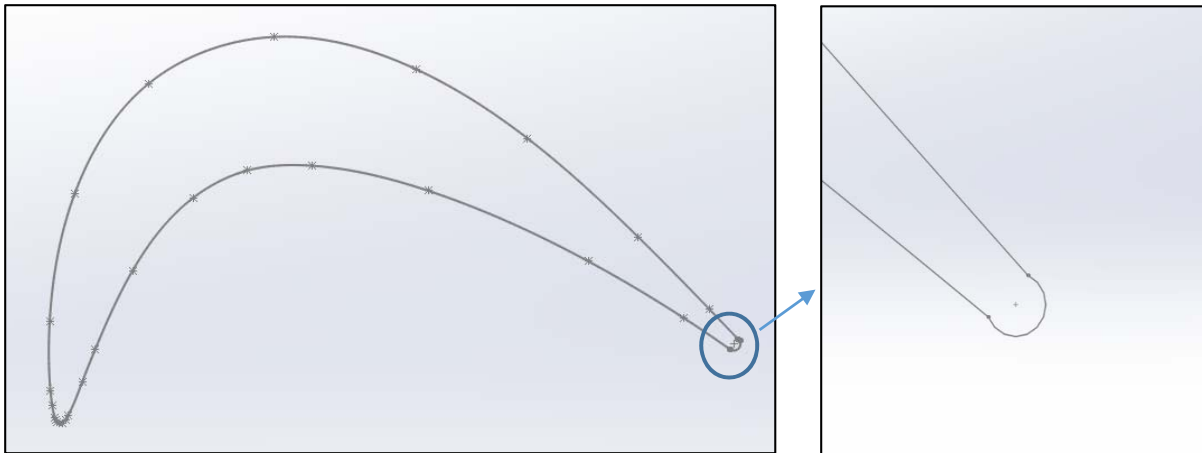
Solidworks sketch of rotor blade showing radius at trailing edge
